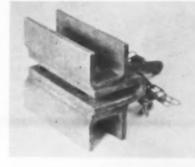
Adjustsble beam walking device made by bending three pieces of steel plate, welding them in five separate pieces and drilling two holes. Weight, 14 lb.
